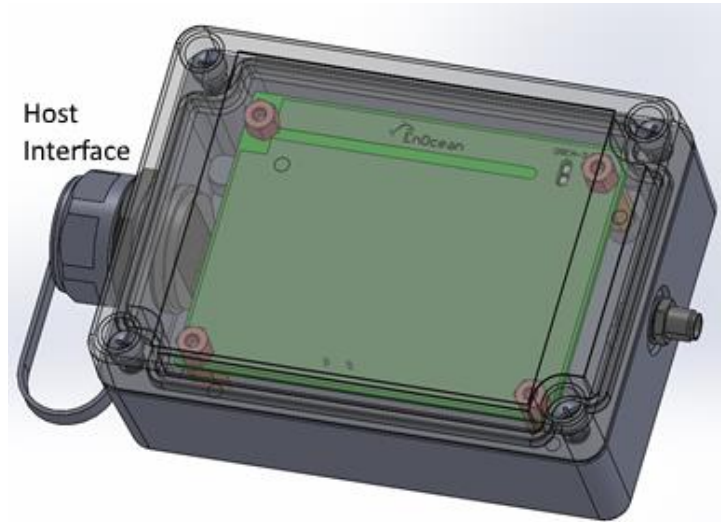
Data logger module PCB inside housing (bottom view of the PCB is seen).
